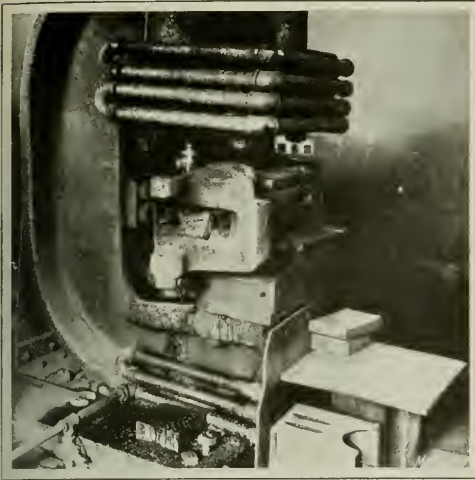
Special Hydraulic Press used for straightening the Shank of a Bent Car Coupling
